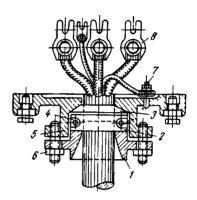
Termination of a trailing cable in a sealing-end box: 1—belled-throat compressing collar; 2—clamping half-ring; 3—rubber packing ring; 4— screws for joining and tightening half-rings; 5—stufing box recess; 6—nuts for securing compressing collar; 7—ear hing screw; 8-cable connector
